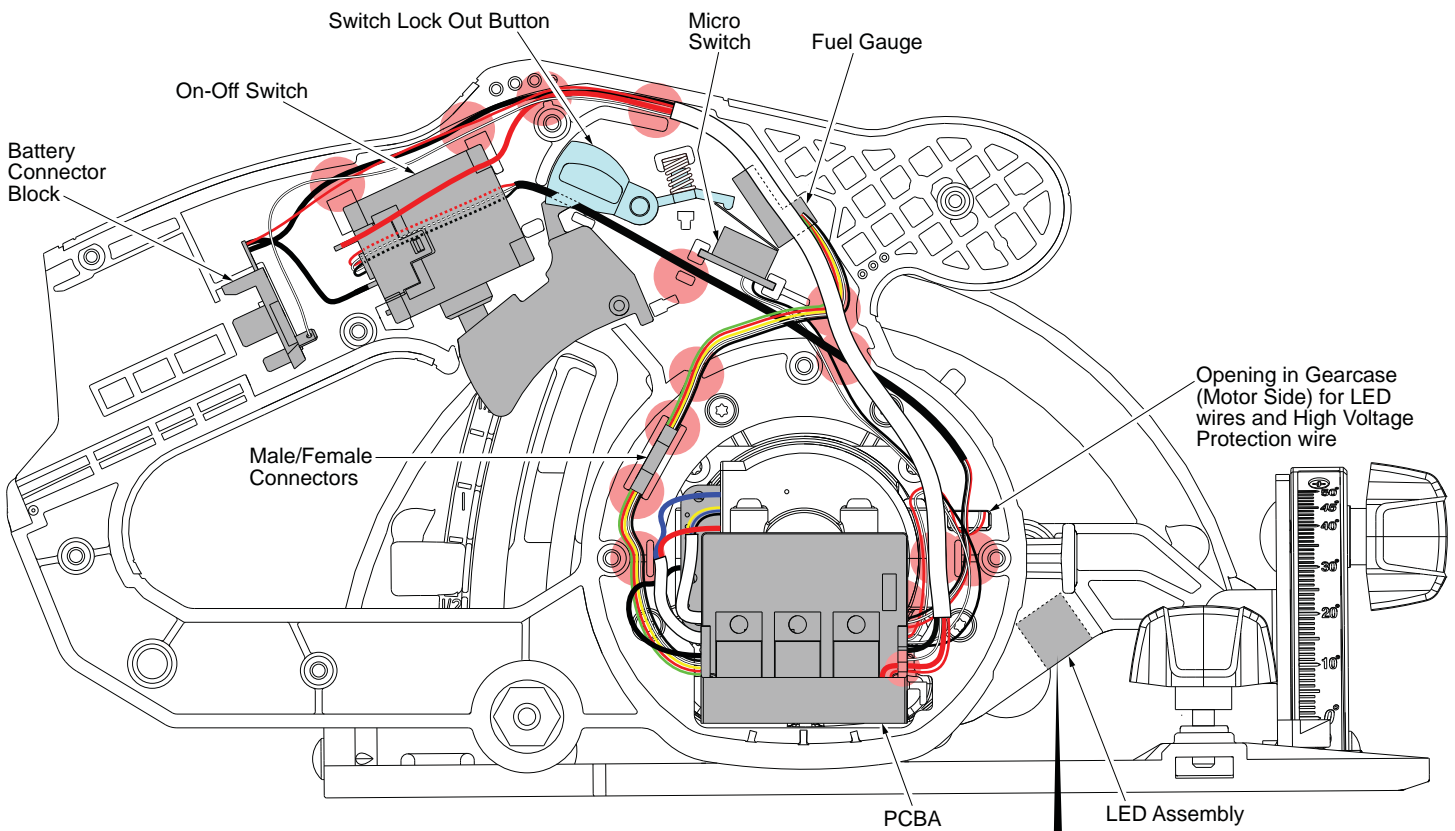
Route female terminal through opening in gearcase. Place red and white wires in trap on motor side and pull taut from blade side.
